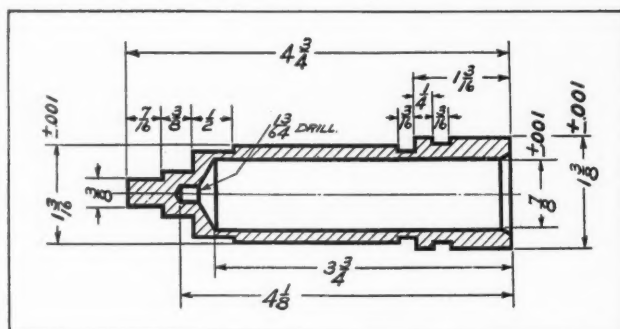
Suction and Discharge Valve Produced by Tooling Methods Shown in Figs. 2, 3, and 4
